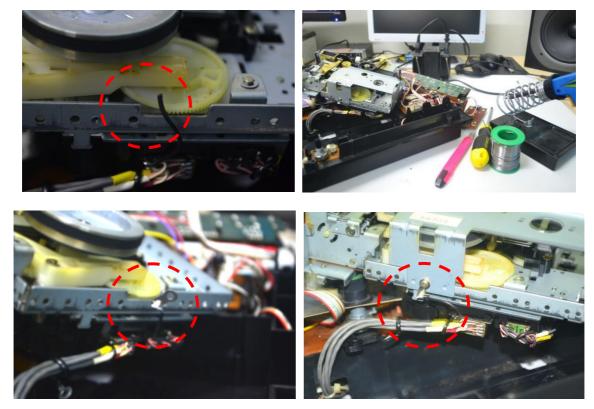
, b, c, and d: broken grounding chassis cable that required fixing.
